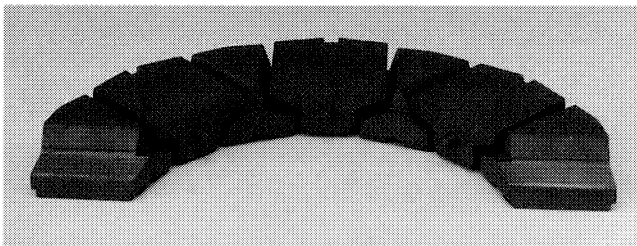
Controlled Inlet Thrust Bearing Upper and Lower Link Assembly.
